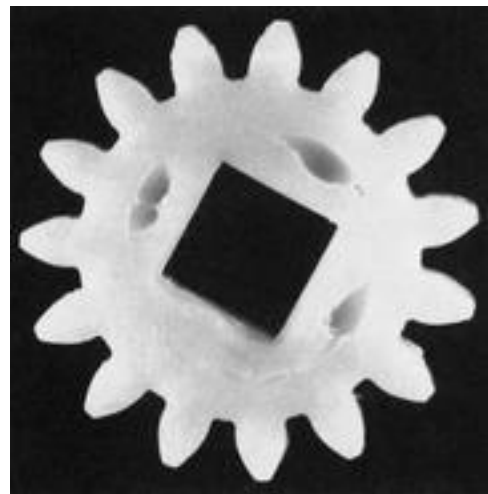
Section through a molded nylon gear showing three large shrinkage holes
